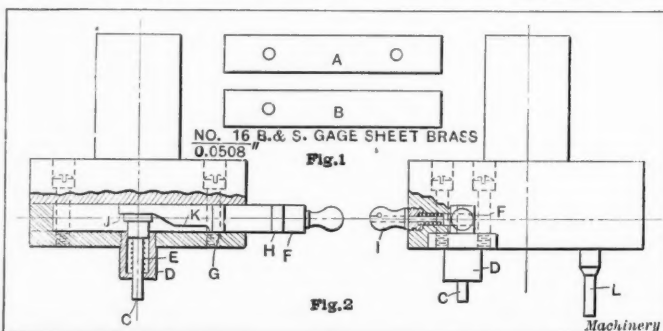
Blank to be pierced. Fig. 2. Adjustable Punch used in piercing the Blanks
